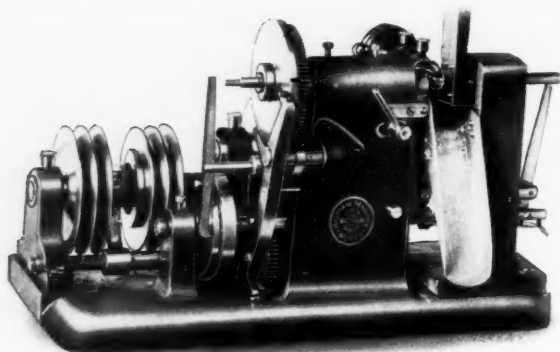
Clutch Cutting Machine, with Magazine and Automatic Feed
